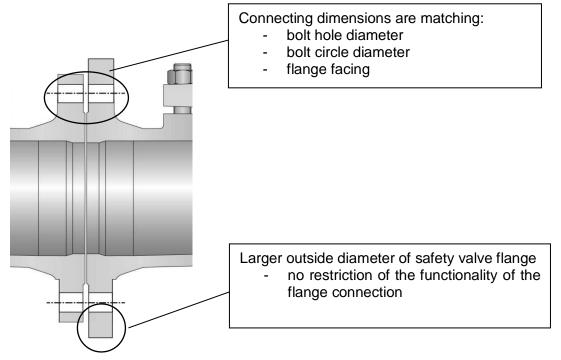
Illustration safety valve flange and pipe flange
